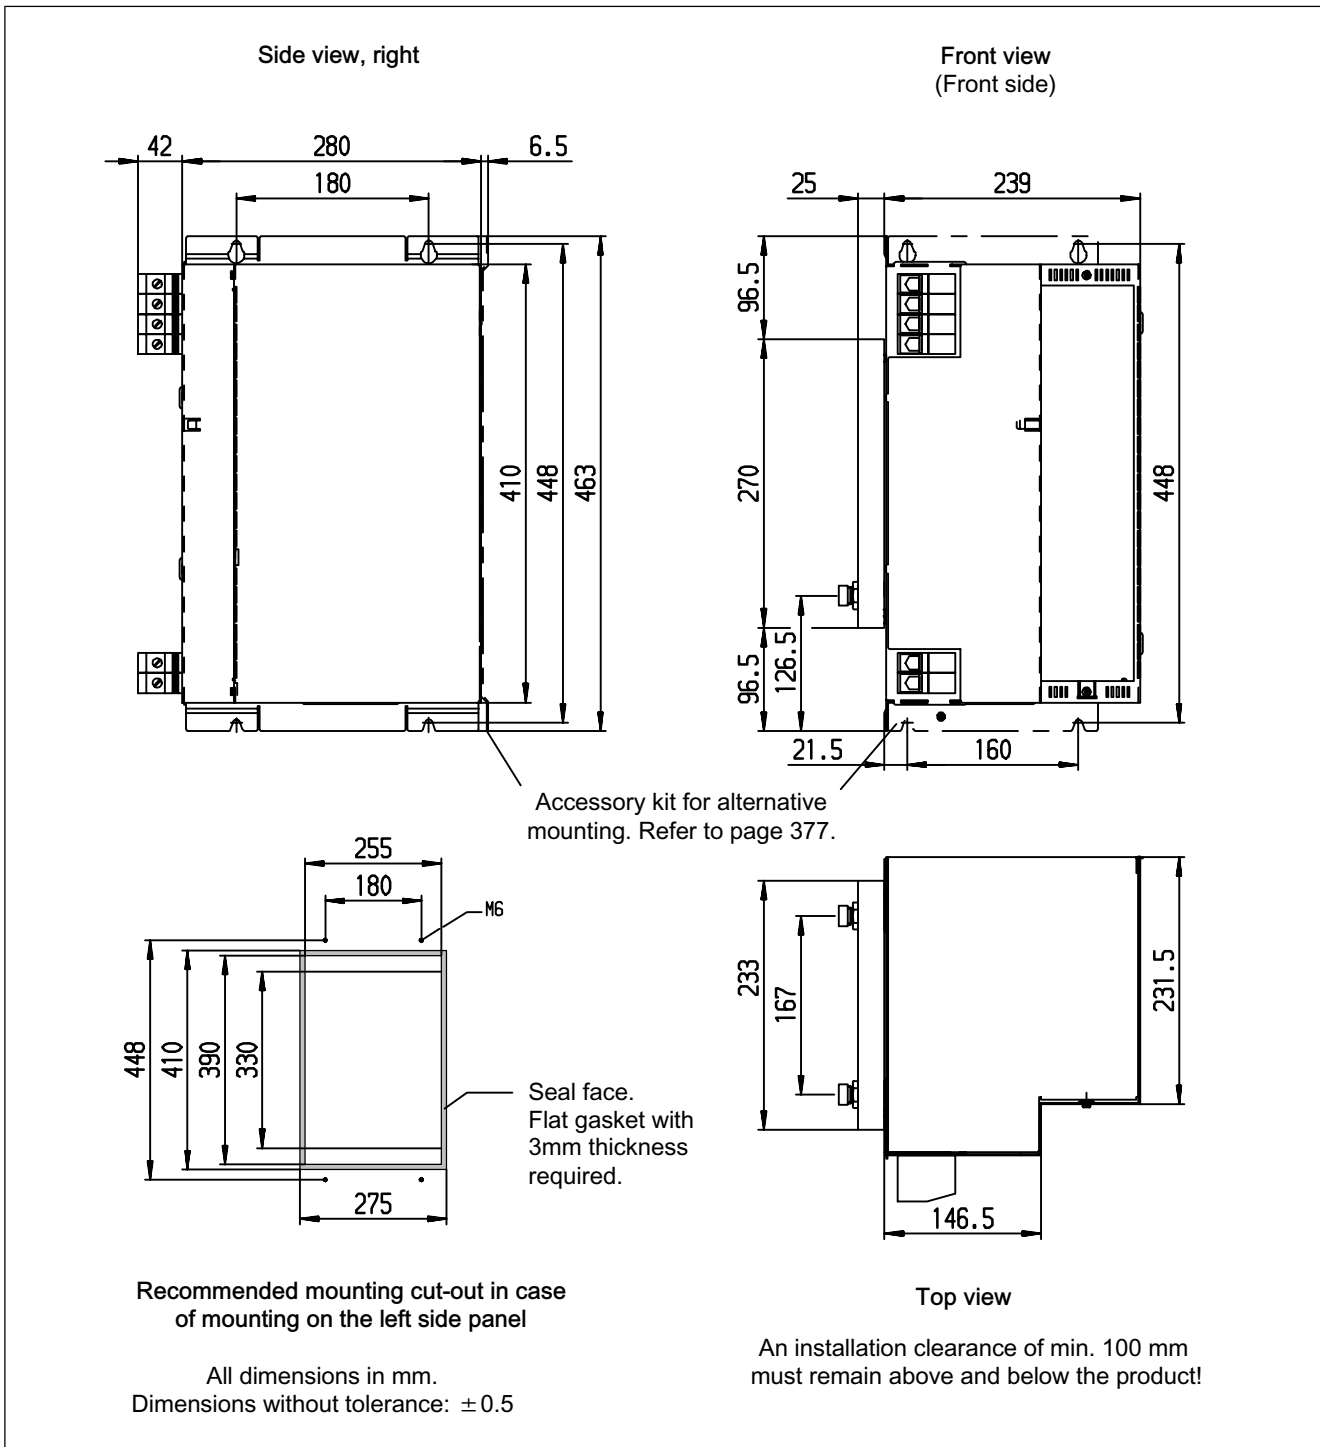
Dimensioned drawing: PSI 6300/63C0.xxx Wx
